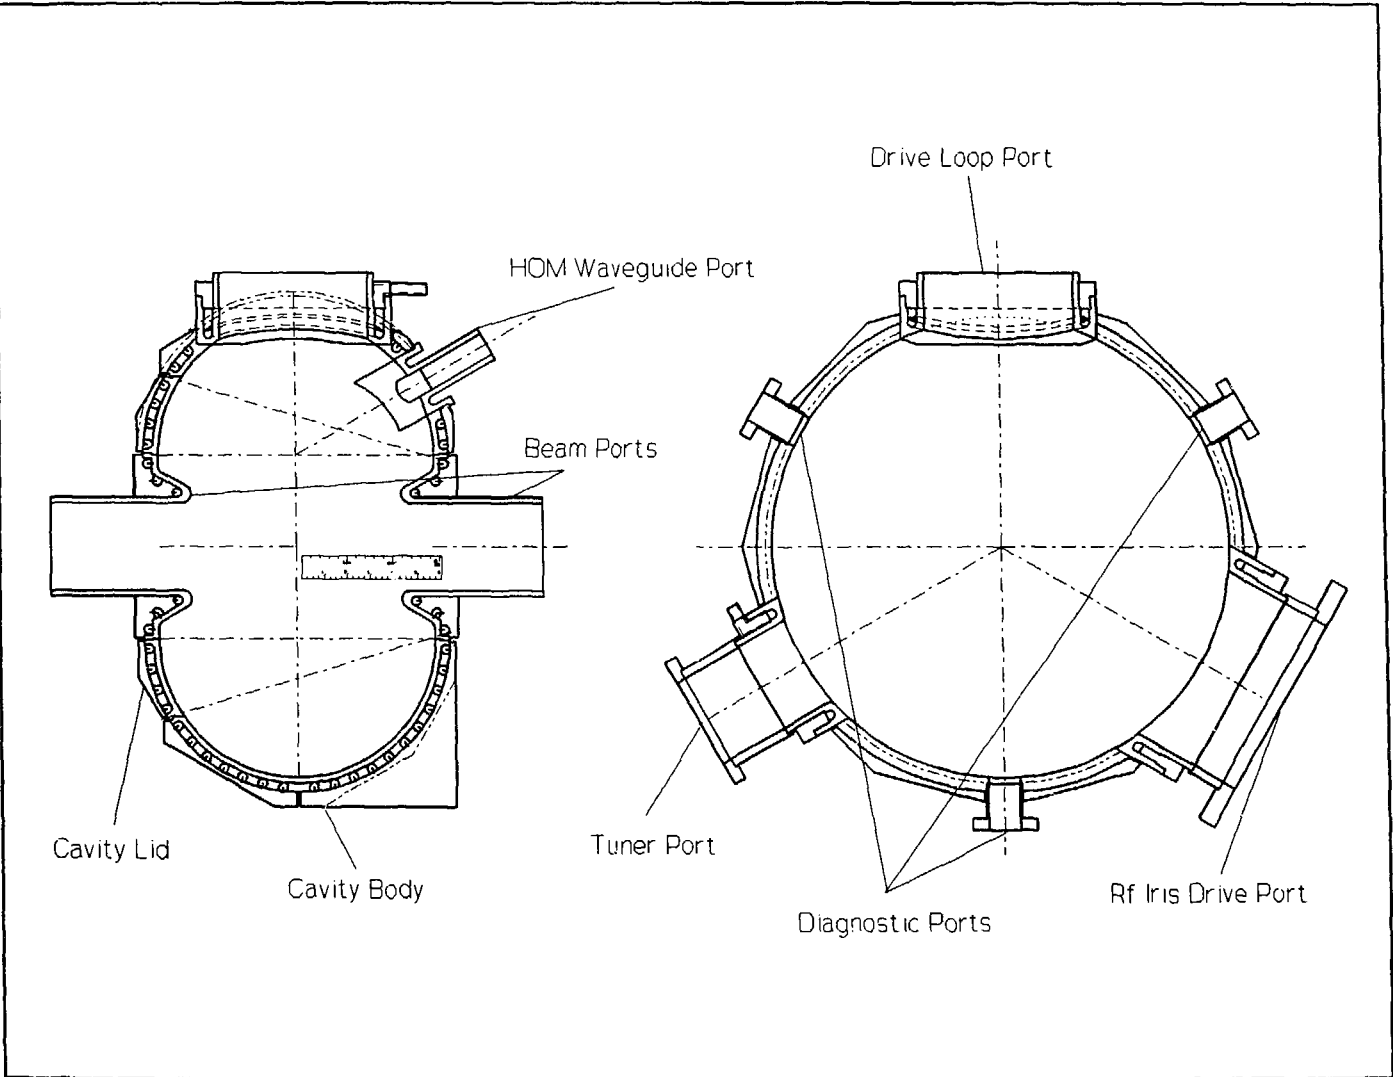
shows an assembly view of the entire cavity. In this design the toroidal shell comprises four sections:
